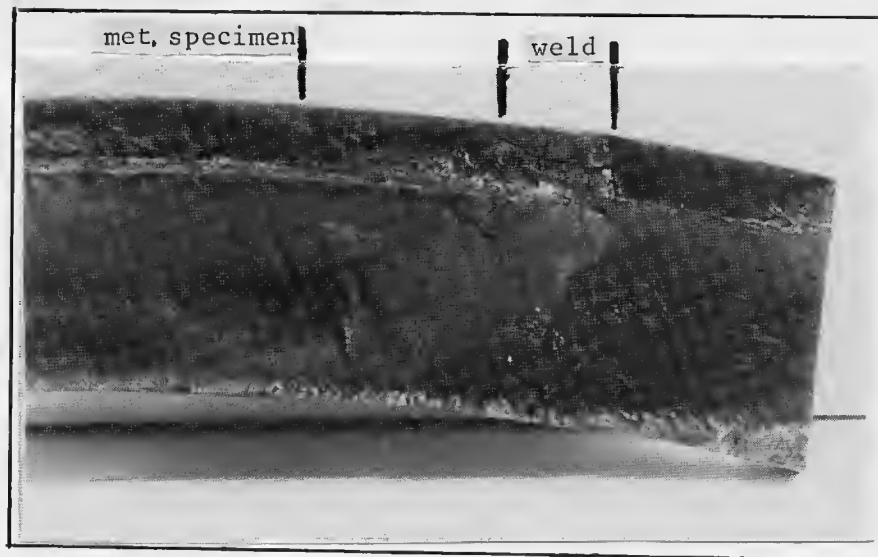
Portion of fracture surface. A crack is visible (made visible by magnetic particle inspection) in the unfractured surface of the gutter. This crack is located at the weld in the rim base. Approx. 1.2X
